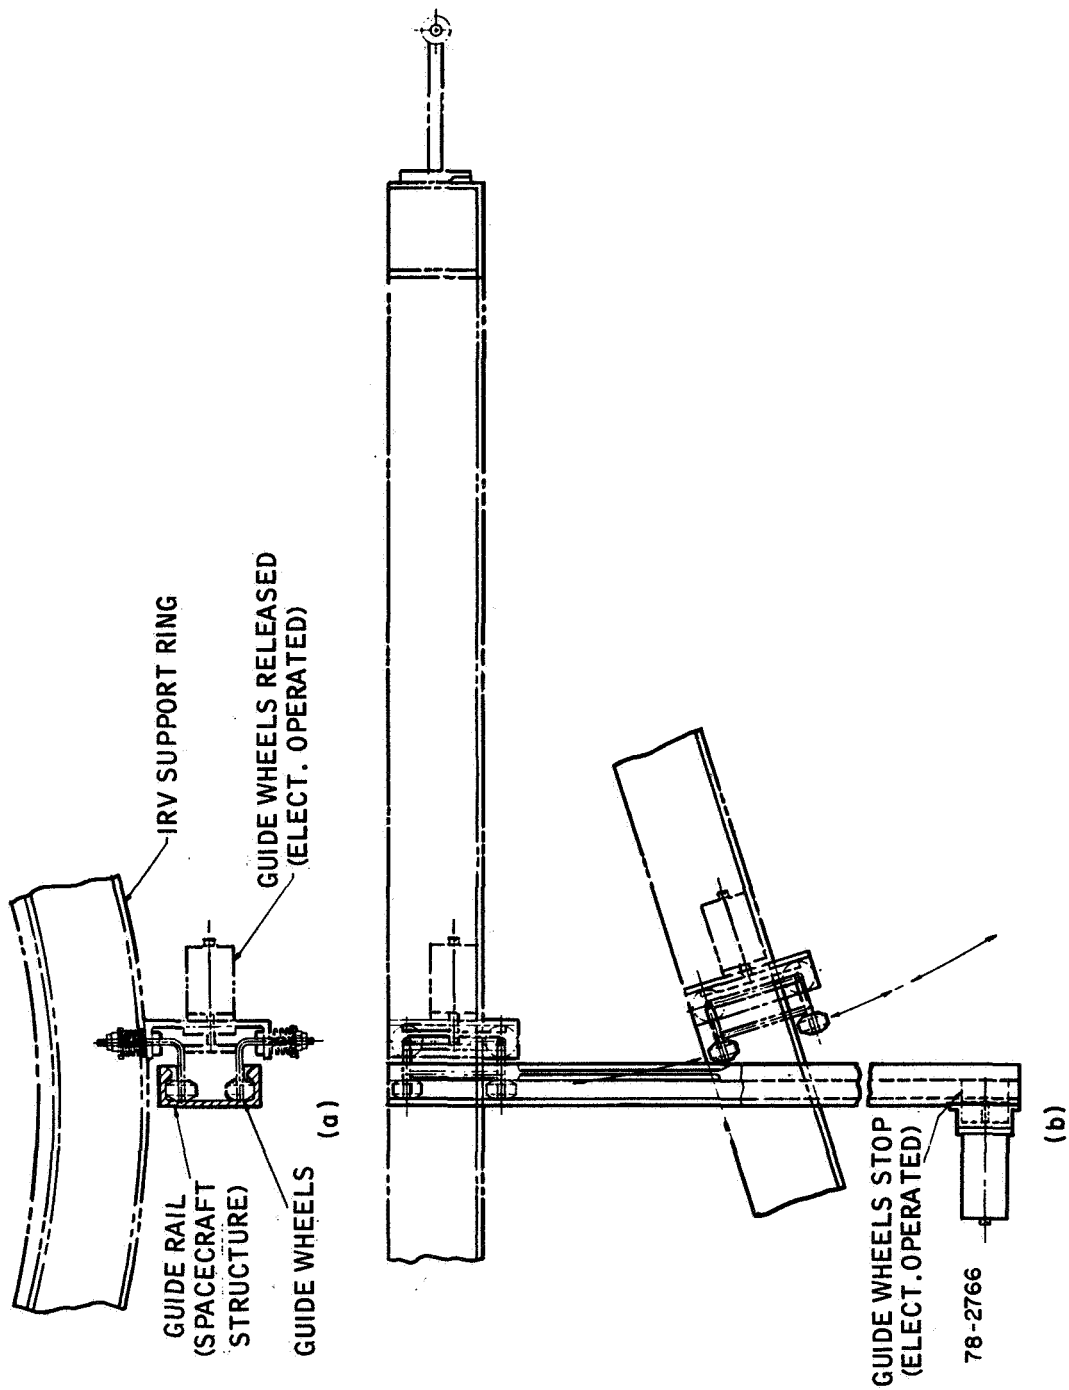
DETAIL VIEW OF GUIDE RAIL ASSEMBLY
